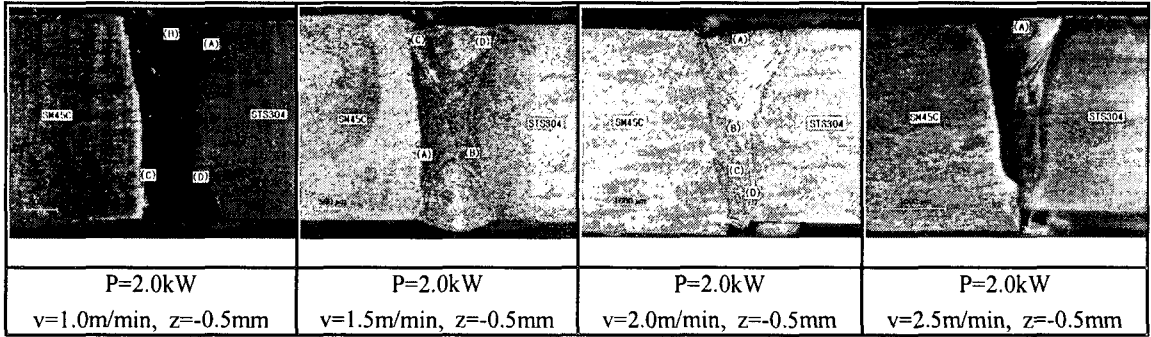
Welding Cross-section of SM45C and STS304 according to the laser beam speed
